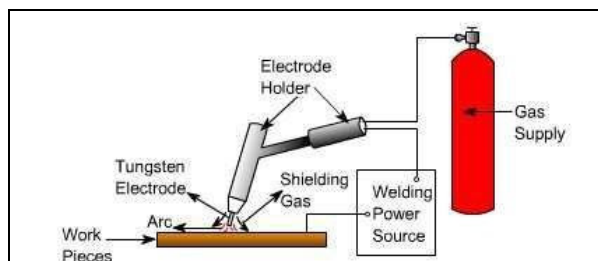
Schematic Diagram of TIG Welding System.
